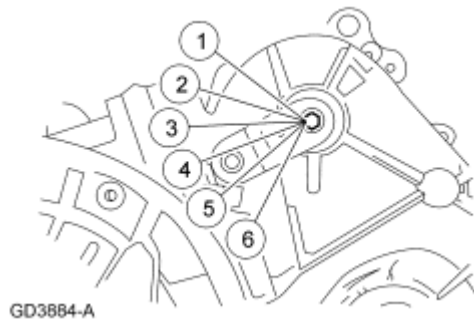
Identifying Manual Valve Detent Lever Assembly Positions
